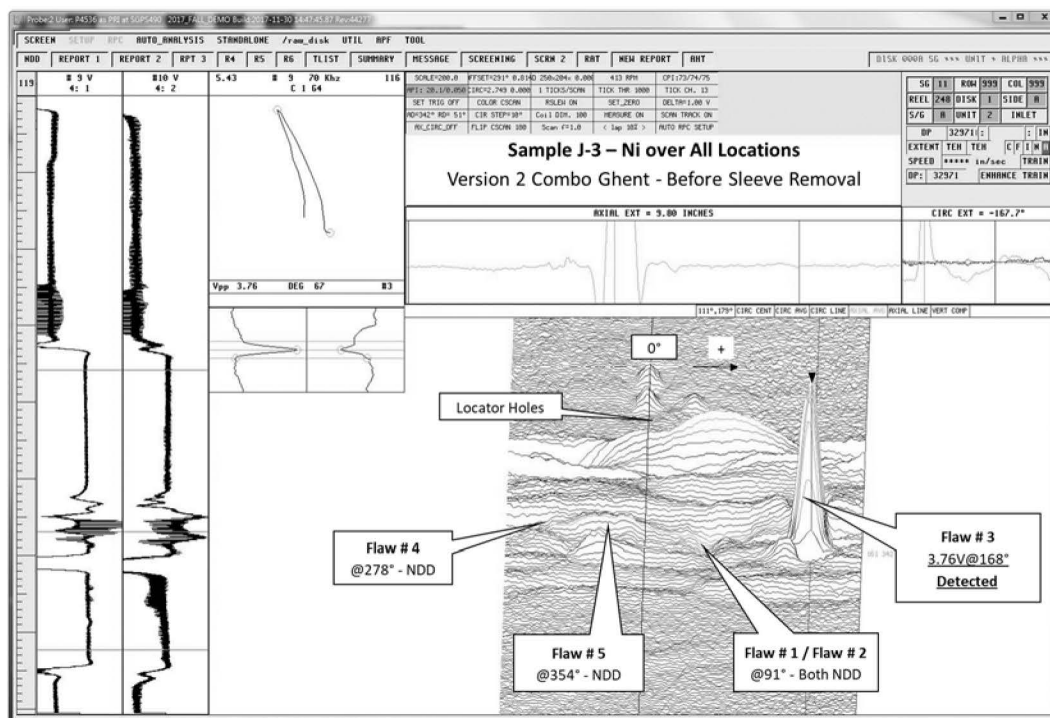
Sample J-3 Sleeve/Tube Assembly Ghent V2, Nickel Over All Flaws C-Scan
